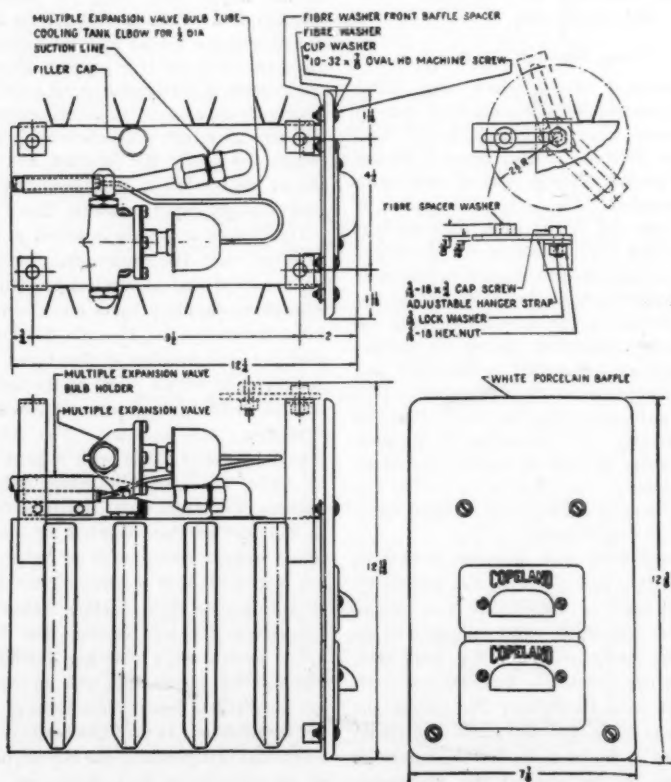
COOLING TANK WITH MULTIPLE VALVE ASSEMBLED
